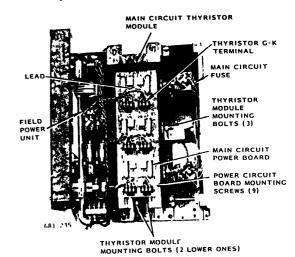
Main Circuit Thyristor Assembly (230V, 260A System)
